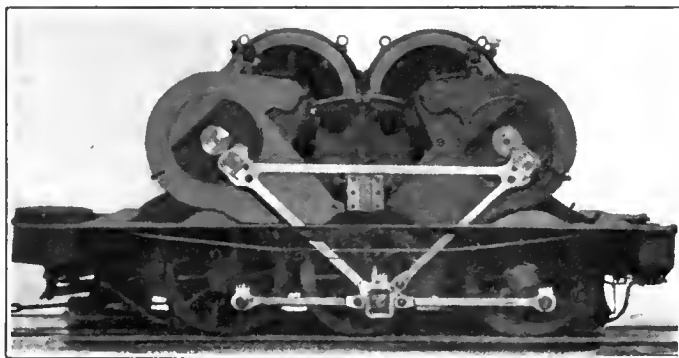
MOTOR MOUNTING AND CONNECTING ROD DRIVE
